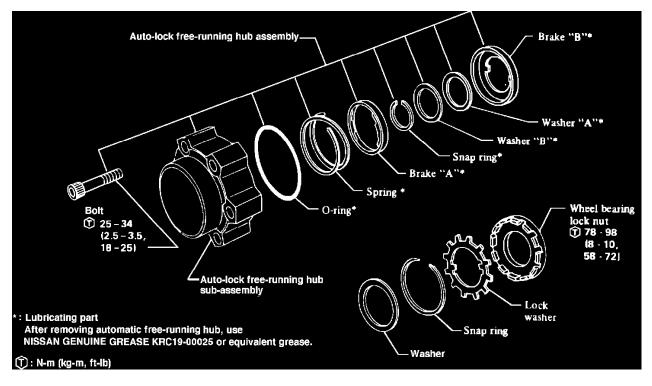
Exploded view of automatic locking hub assembly. 1985-88 4WD Pickup
